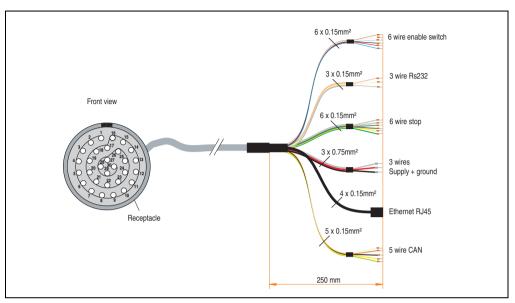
Cable layout - switching cabinet cable 5CAMPC.0020-10
